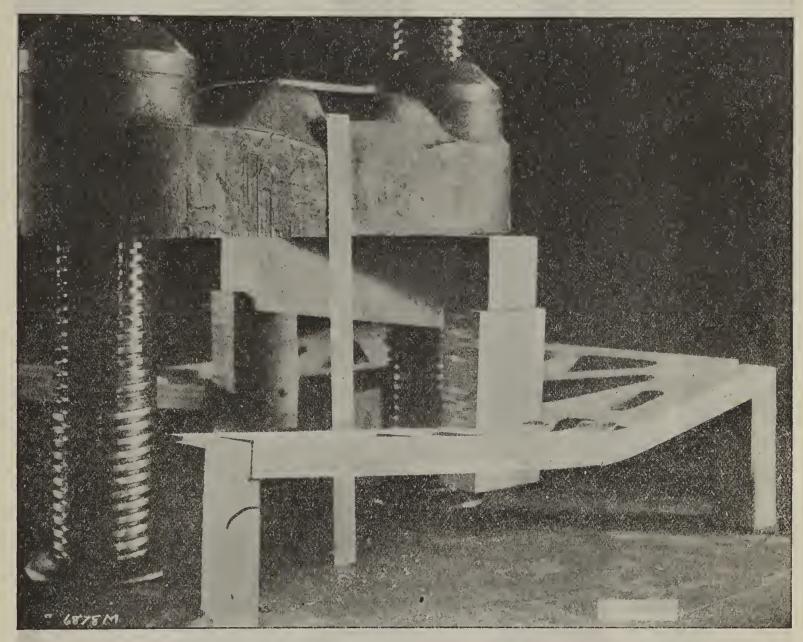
Strength tests of engine bearers: Method of testing for thrust loading.
